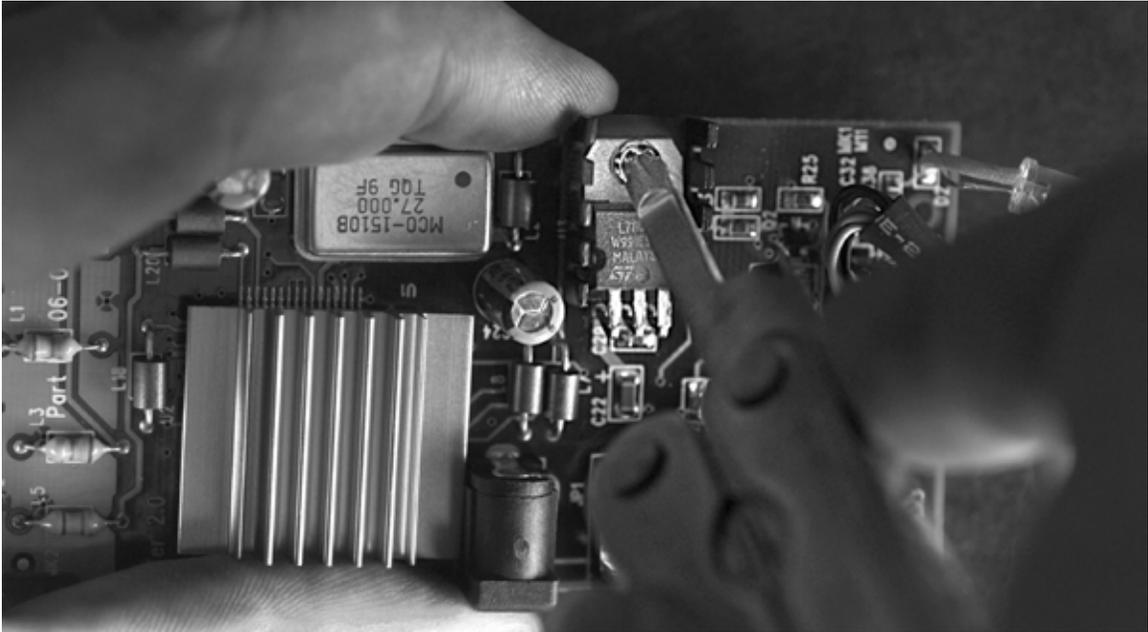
Take the circuit board out of the “pocket scan converter”. Remove the screw holding it in.
